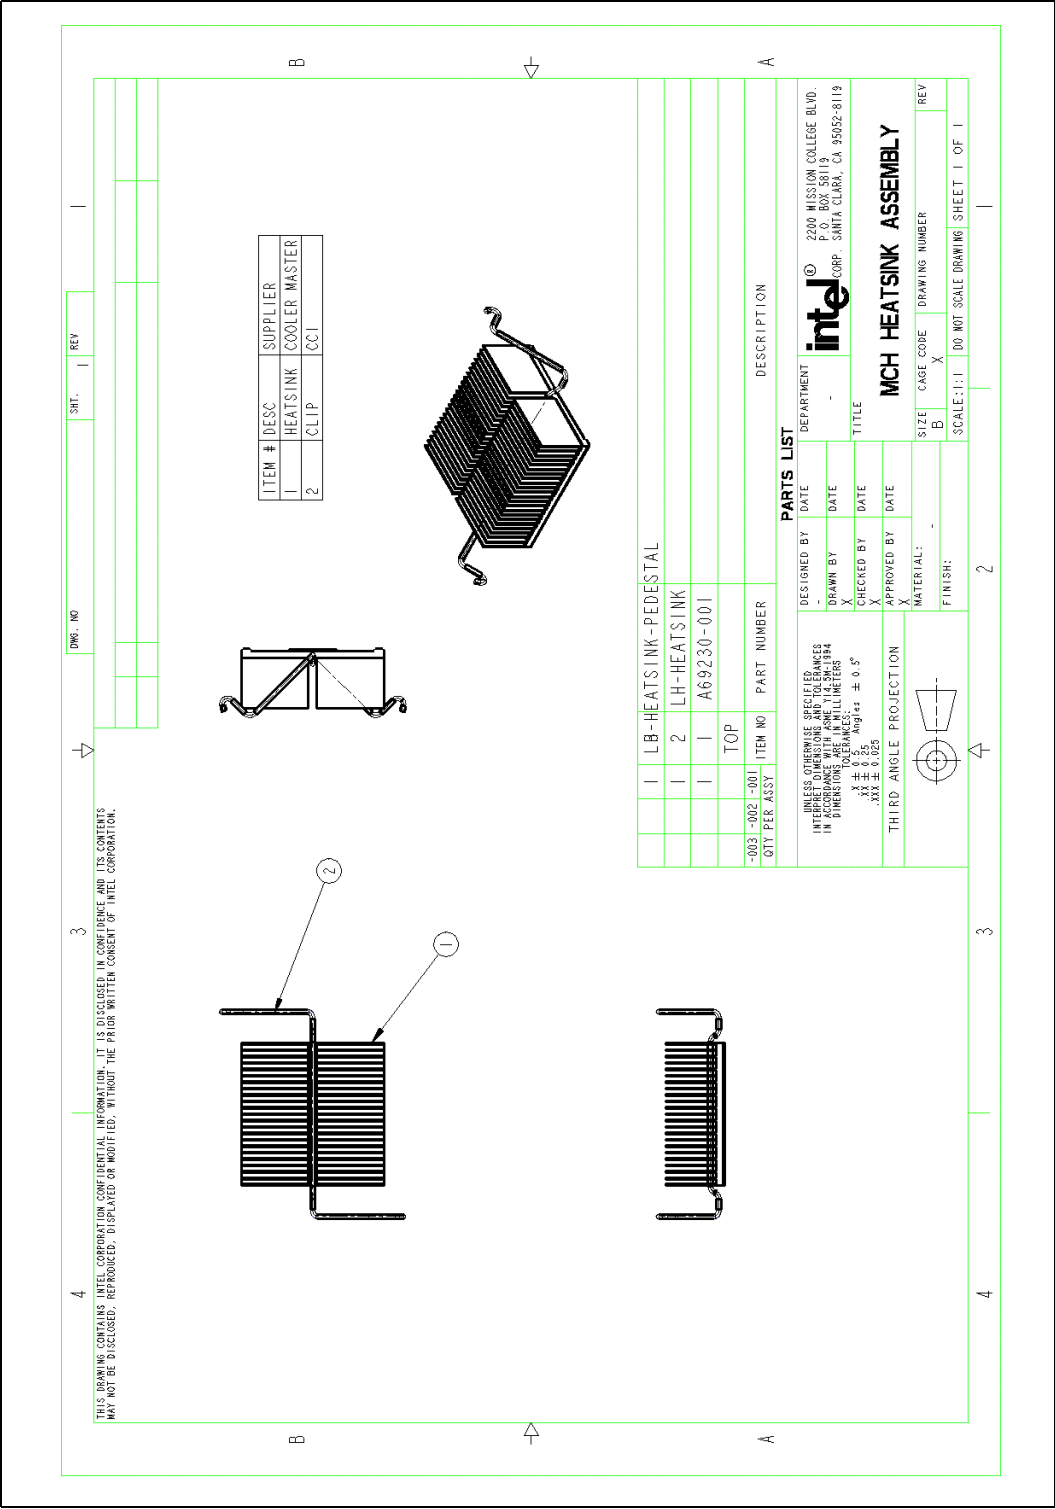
Mobile Intel® 915GM/915GME/910GML Express Chipset GMCH Aluminum Heatsink Assembly
